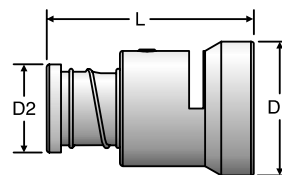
Captive O-Ring Assembly Tool dimensions
